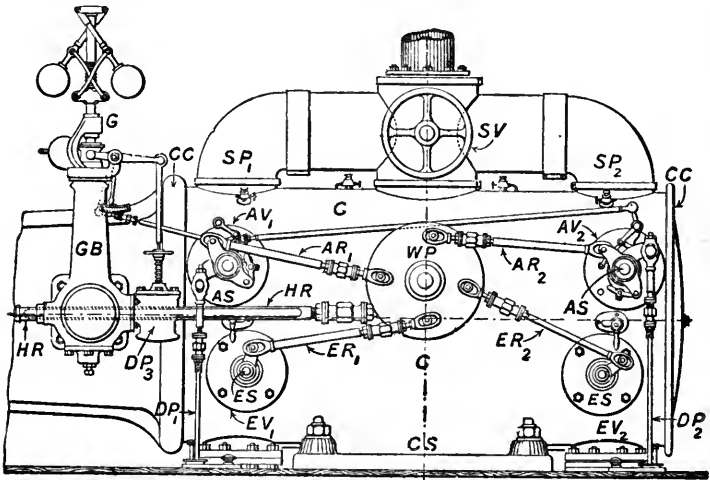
OUTSIDE VIEW OF FARCOT-CORLISS VALVE GEAR.
